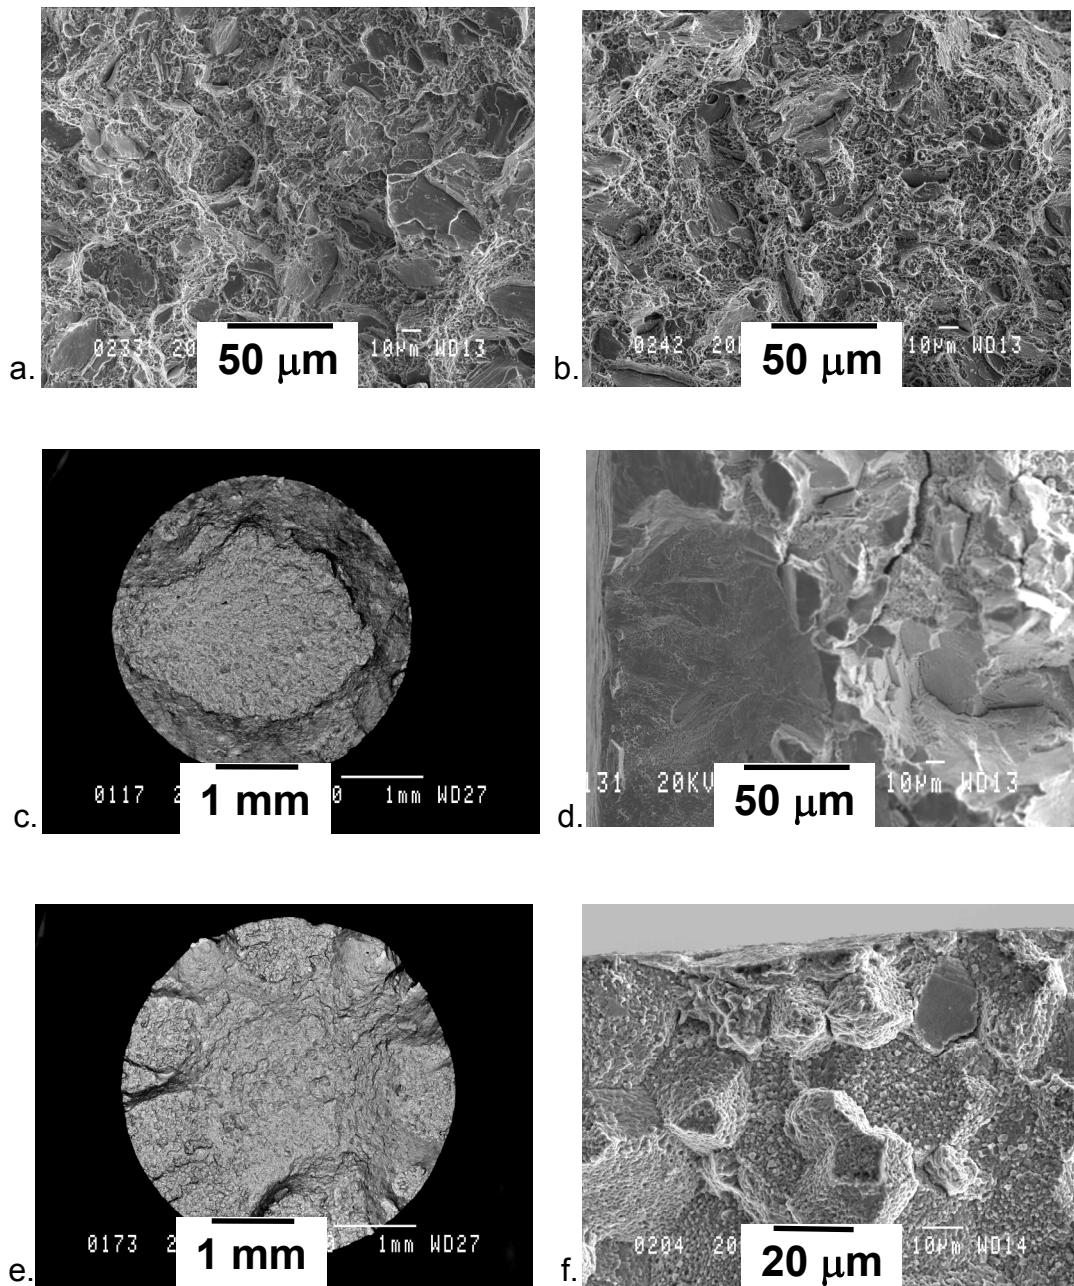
Fracture surfaces observed for supersolvus tensile specimens tested at a. 75 °F, b. 800 °F, c. and d. 1300 °F, e. and f. 1500 °F.
